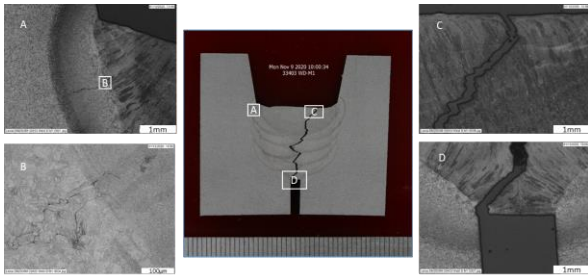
Photomicrograph showing a transverse cross section of a FCA welded U-groove sample made between S690QL parent material AWS A5.29 E111T1 weld metal
